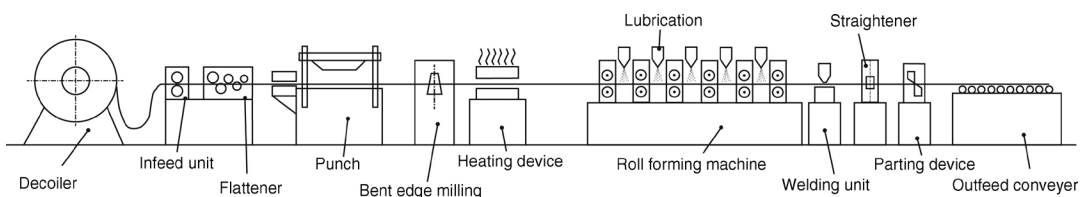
Schematic illustration of a typical roll forming machine. Source: Ref 10.3
